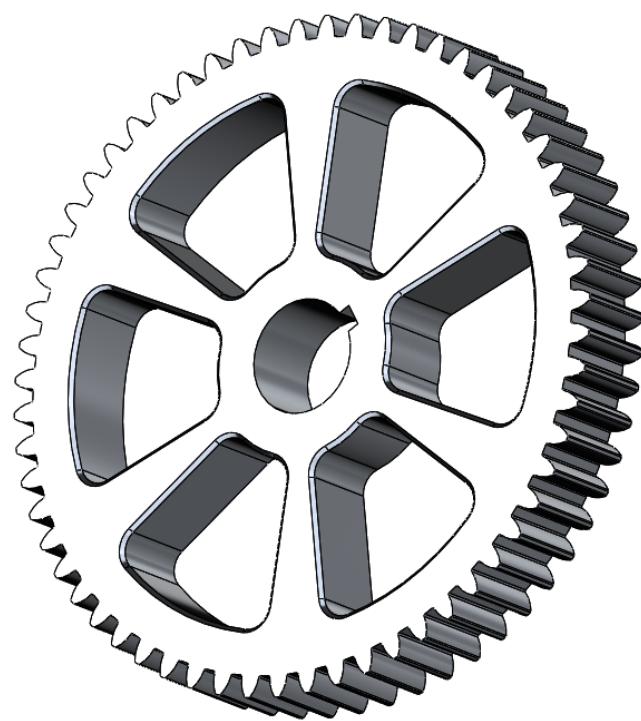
Hirani, Asimm: 60 Tooth Gear
